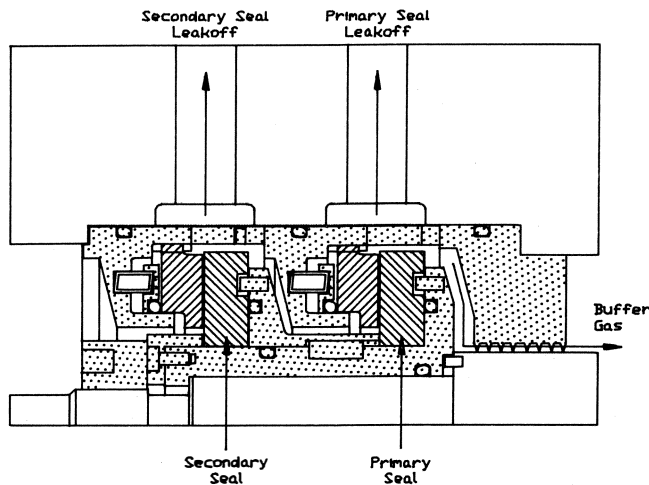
Gas Lubricated Face Seal Showing Buffer Gas and Seal Leakoff.
